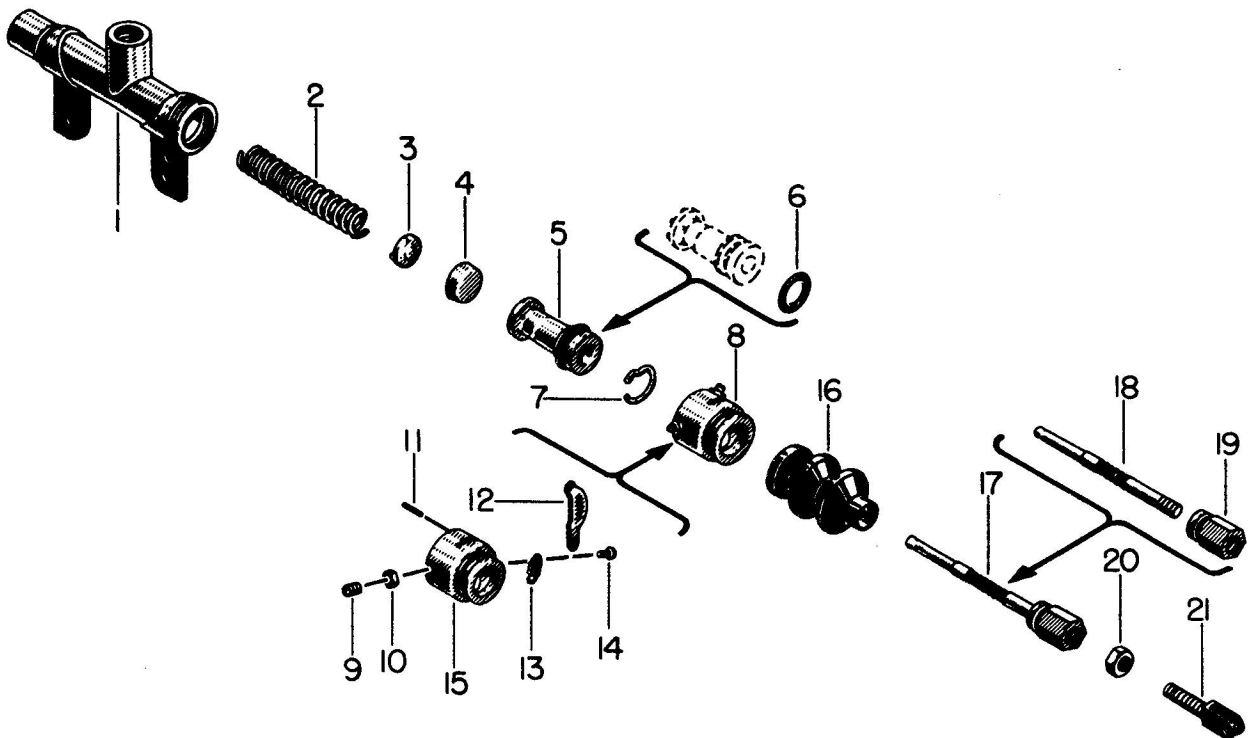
3/4-inch Master Cylinder - Exploded View
